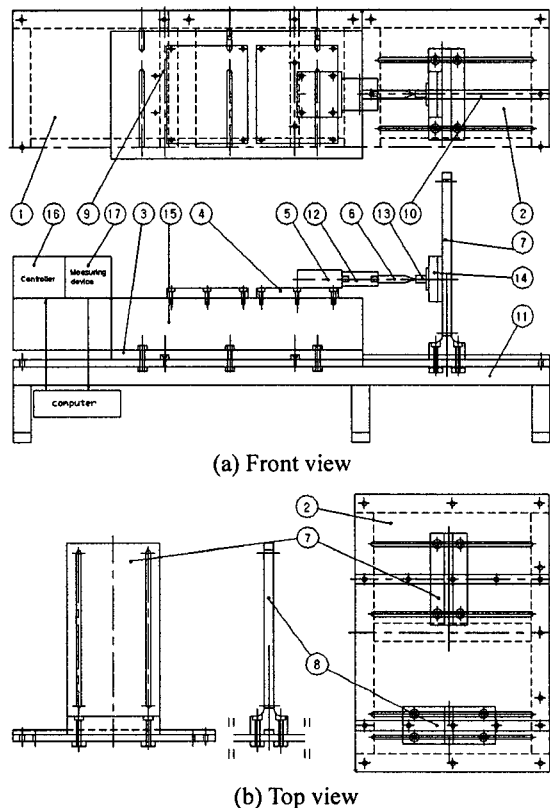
Assembly drawing of the manufactured multi-axis force/moment sensor calibration system
